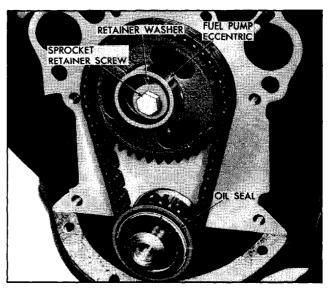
Front of Engine with Timing Sprocket Cover Removed
